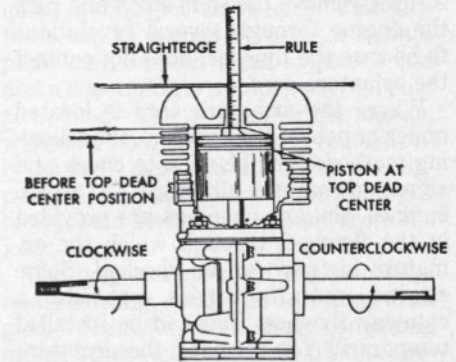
Where timing is specified as measurement of piston travel, measurement can be made as illustrated. Use of a dial indicator instead of ruler will give more exact measurement. Some manufacturers provide a timing gage that can be screwed into spark plug hole or a gage that can be attached to crankshaft.
